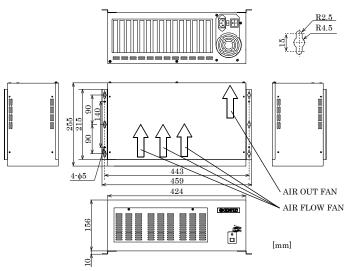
Outside Dimensions < ECH(PCI)SF-H13A, Horizontally placed >
